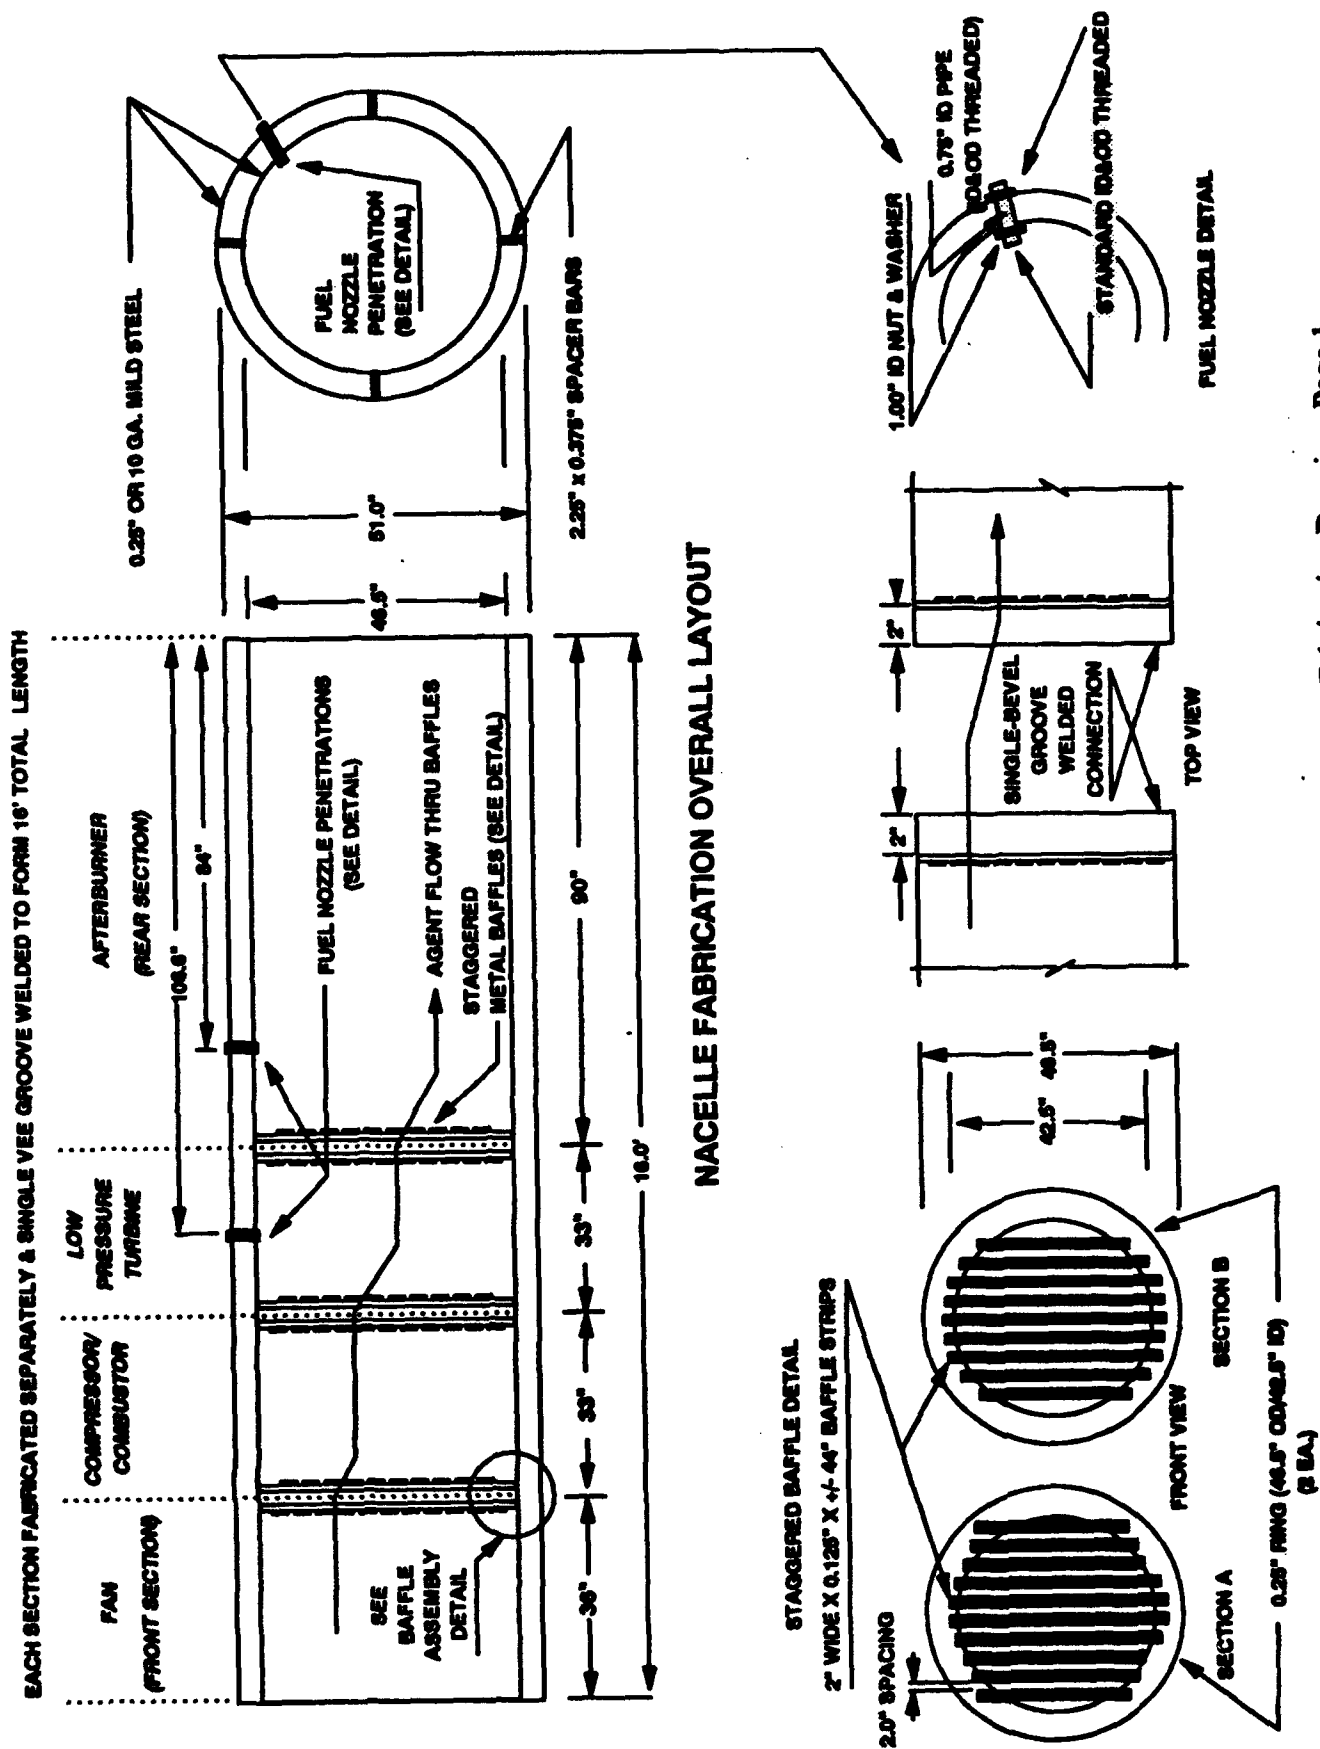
F-100 Engine-Nacelle Test Apparatus; Fabrication Drawing, Page 1.
